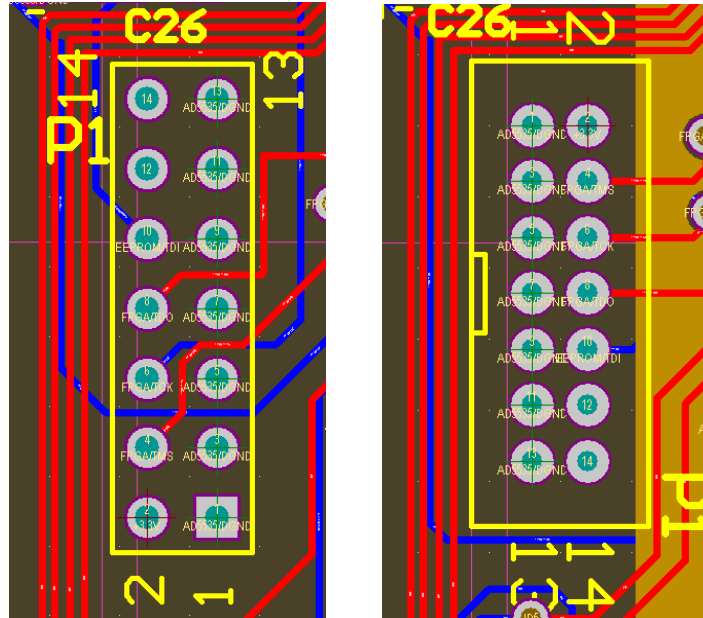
Close-up CAD drawings of the footprint of the FPGA's JTAG configuration header and surrounding traces before (left) and after (right) the incorrect 100 mil header was replaced
